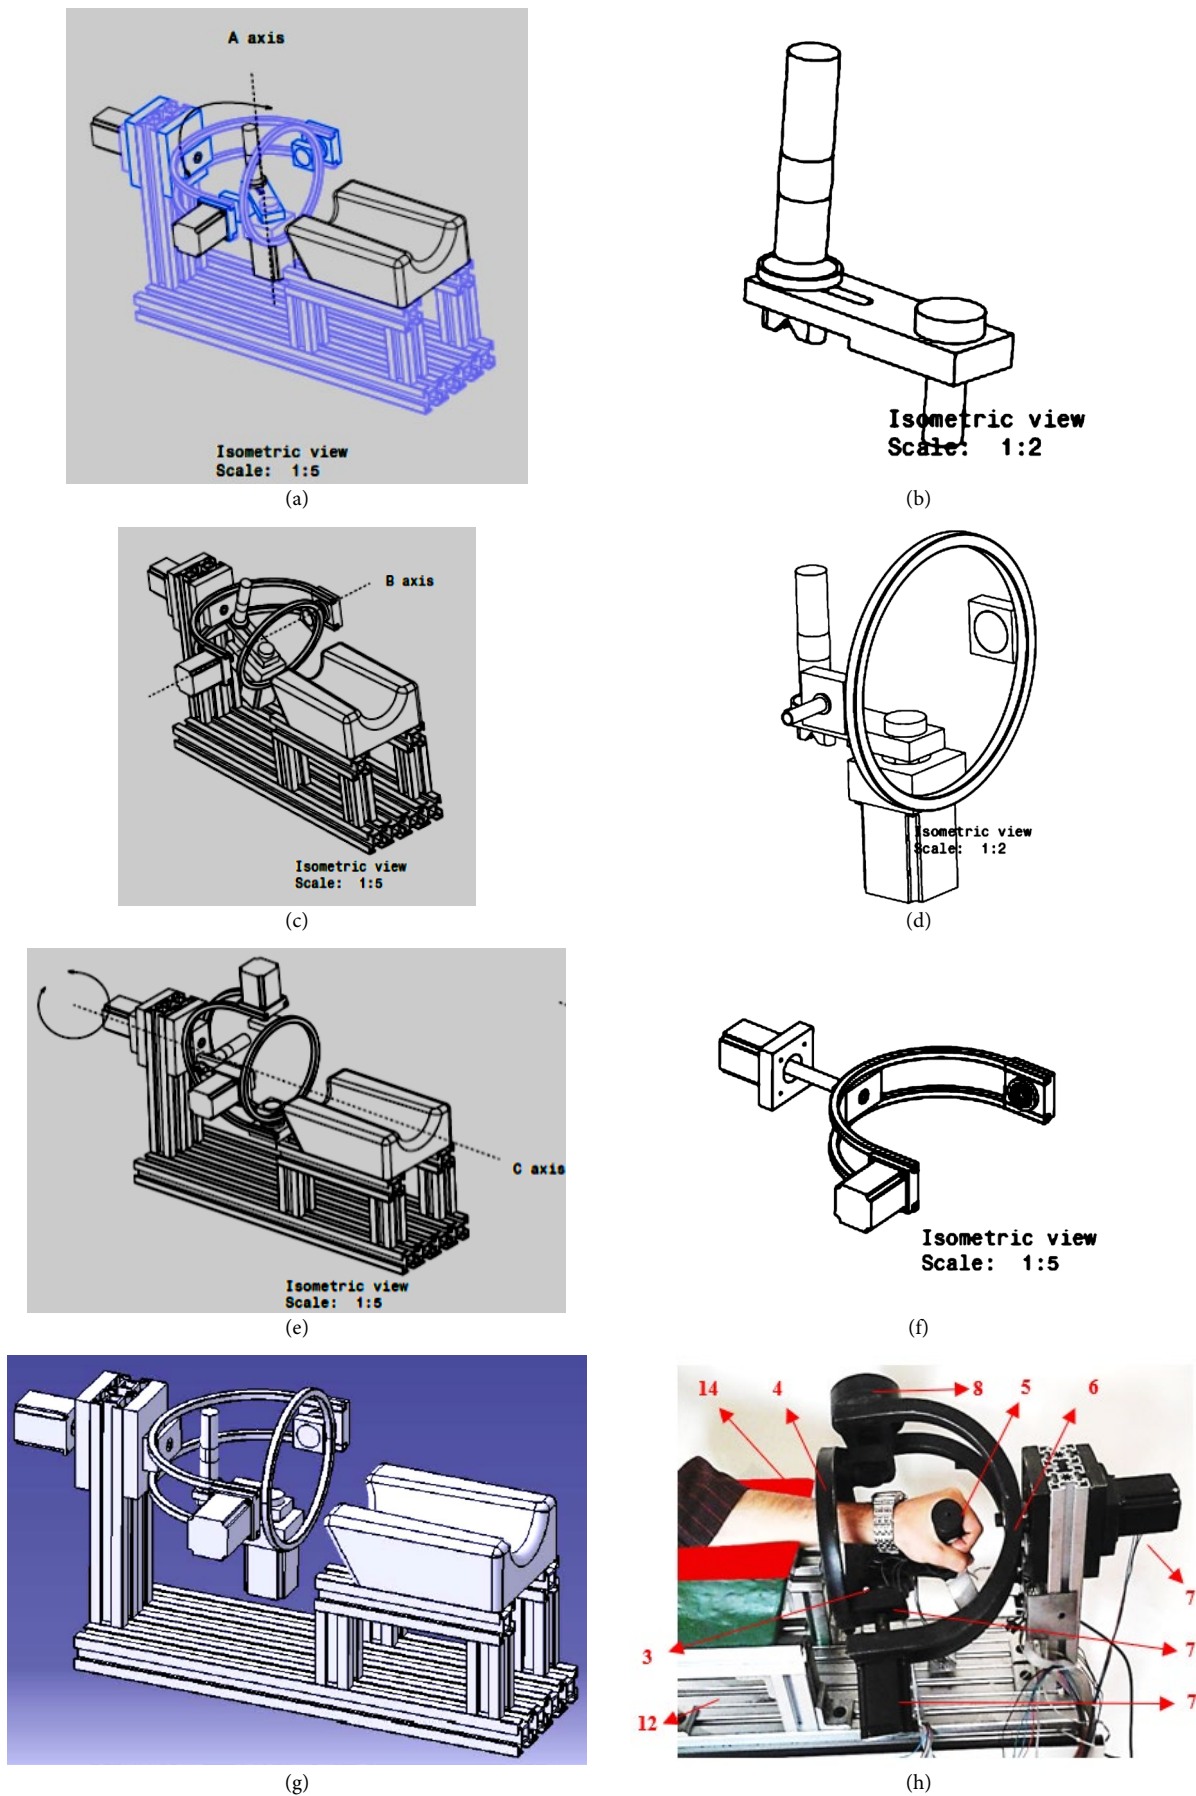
Mechanical structure of the rehabilitation robot device: (a) complete assembly of the horizontal arm (linear axis A); (b) detail view of the horizontal arm; (c) complete assembly of the vertical arm (linear axis B); (d) detailed view of the vertical arm; (e) complete assembly of the rotational arm (rotational axis C); (f) detailed view of the rotational arm; (g) designed view; and (h) experimental/constructed views.
